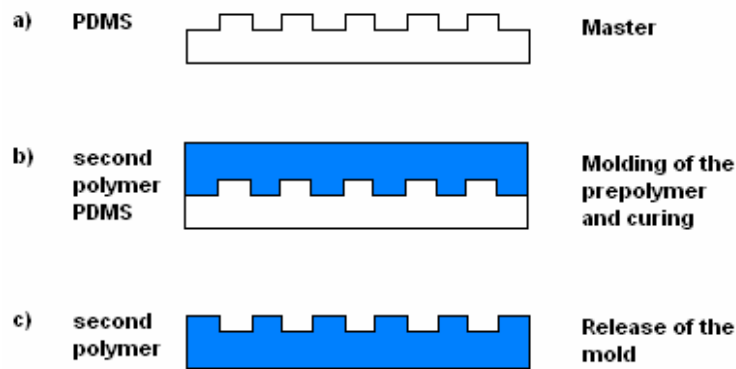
Replica molding: casting the prepolymer mixture into a PDMS master and crosslinking it then removing the master, thus fabricating the stamp or mold [6].
